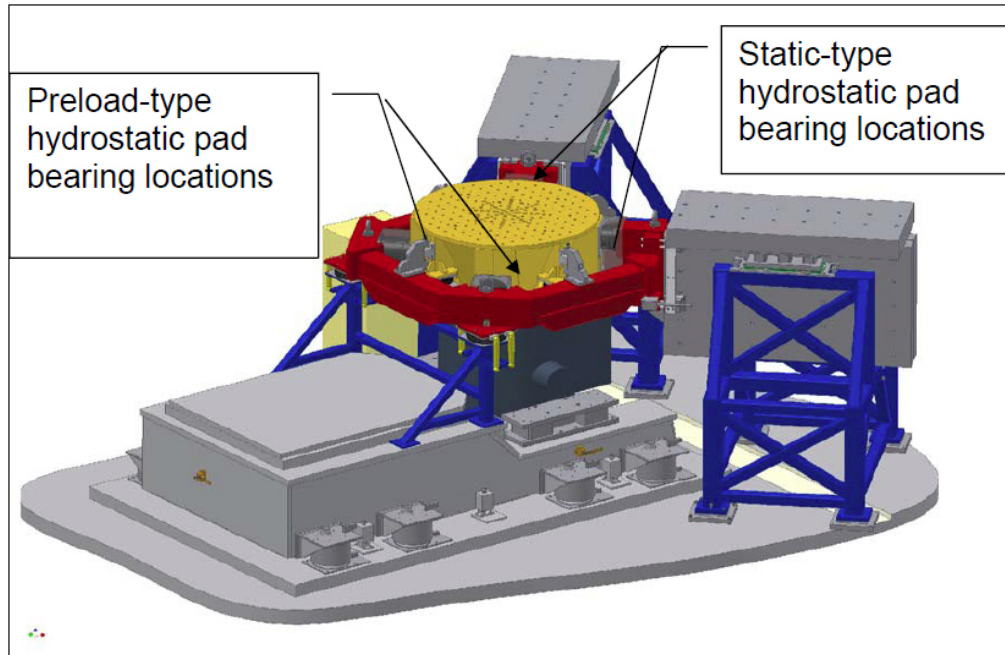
The design uses a 1.5-m (4.921-ft) diameter guided vertical head expander.
